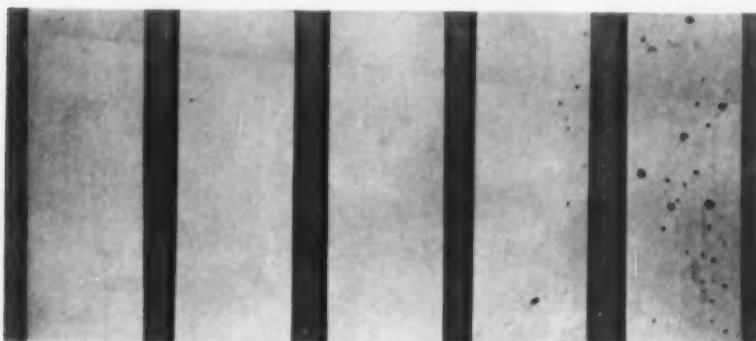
Each set of five machined test castings was poured, L to R, at: 2200, 2100, 2000, 1900, 1800 F. Sprue bottoms of these were left ragged.
